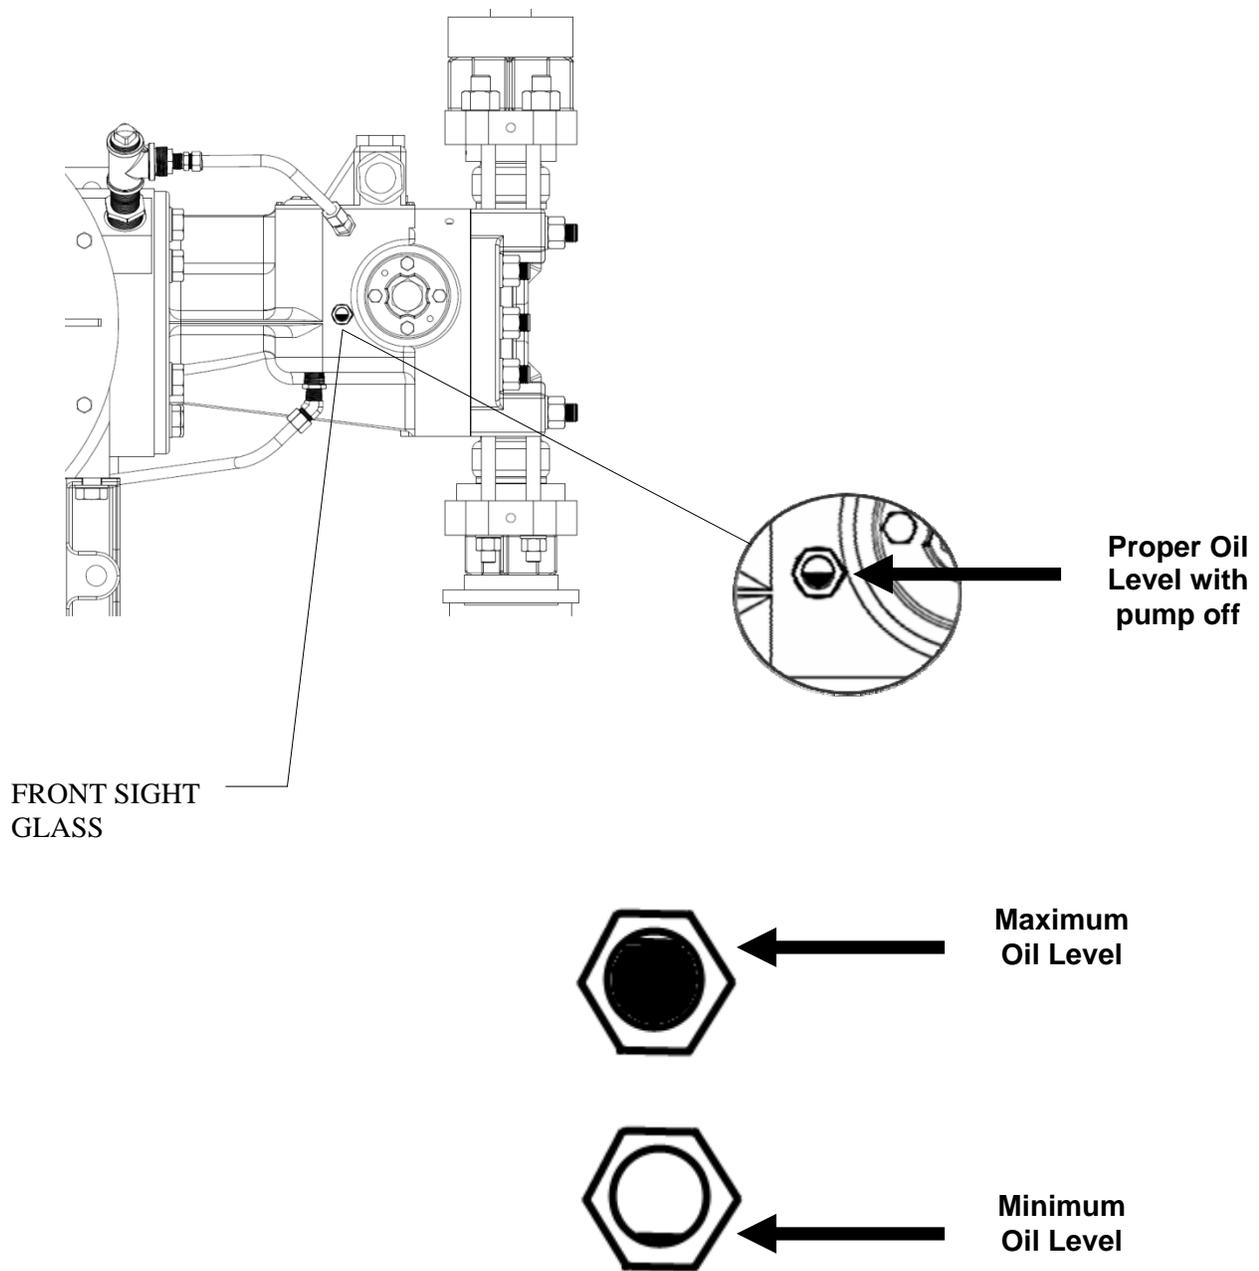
B: Pump Head Oil Level – Maximum/Minimum Definition
